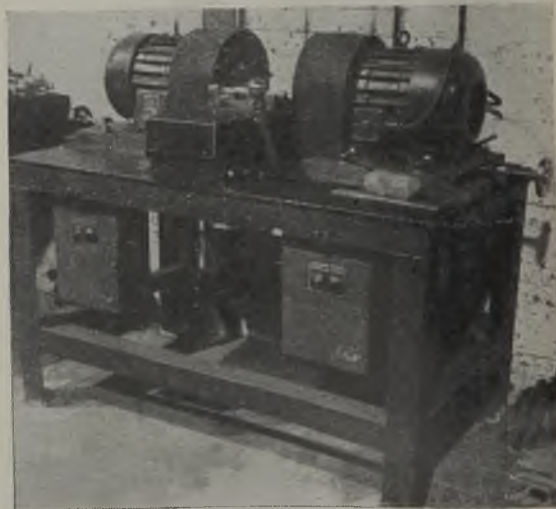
TYPE OF GRINDING MACHINE USED FOR ONE TYPE OF LINK.
